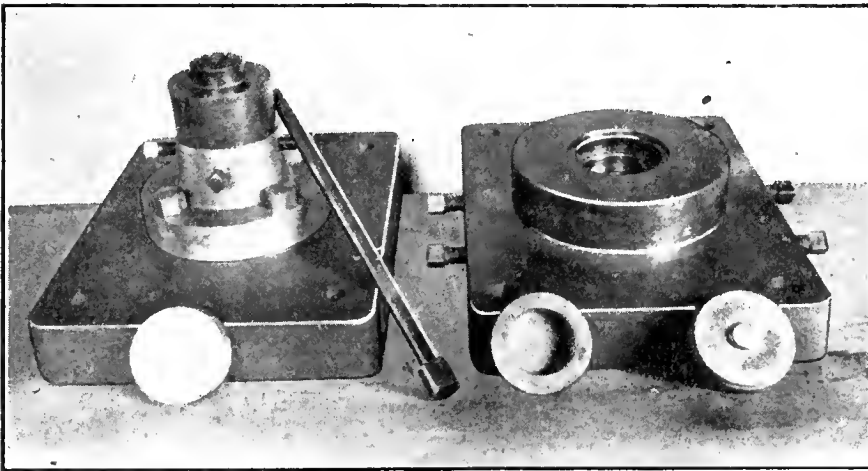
A. DIE FOR FORGING BRASS SOCKETS.
